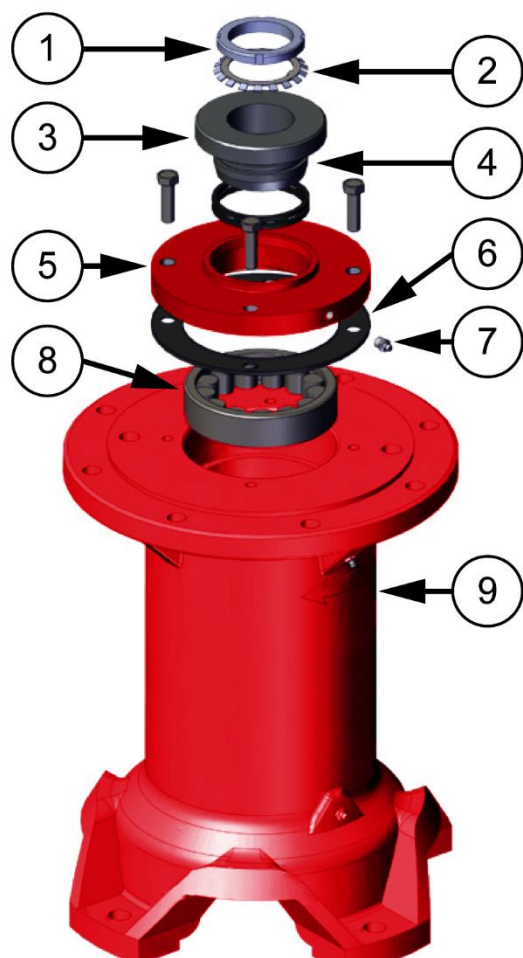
Fitting Upper Bearing Outer Ring and End Cover to Bearing Housing.
